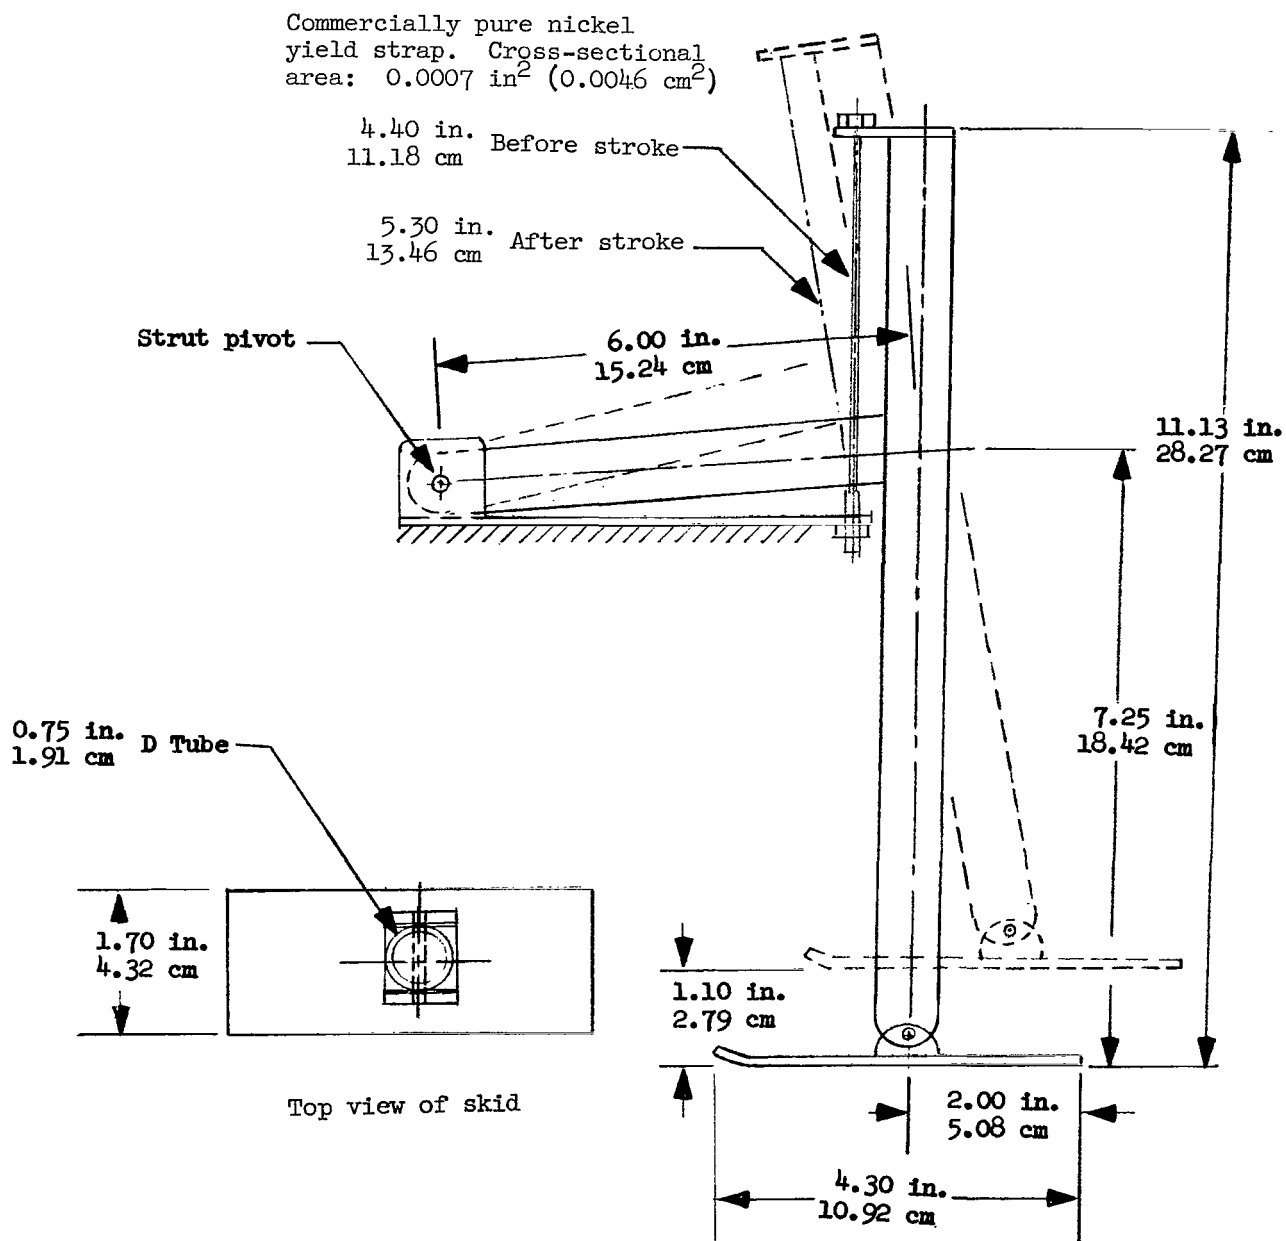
Typical mechanism for four-skid installation. Dimensions are model size.
